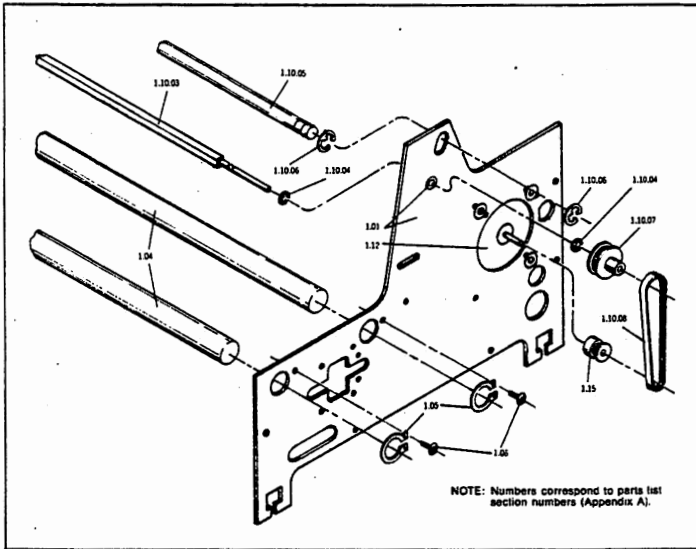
SuperTerm Printer Tractor Rod/Carriage Rail Mounting Right End-Plate
